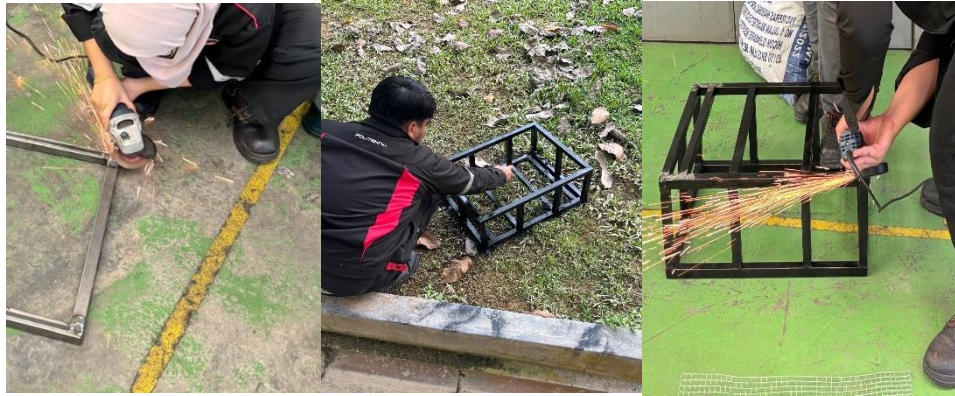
Show the progress to produce upper body by cutting, grinding and welding
